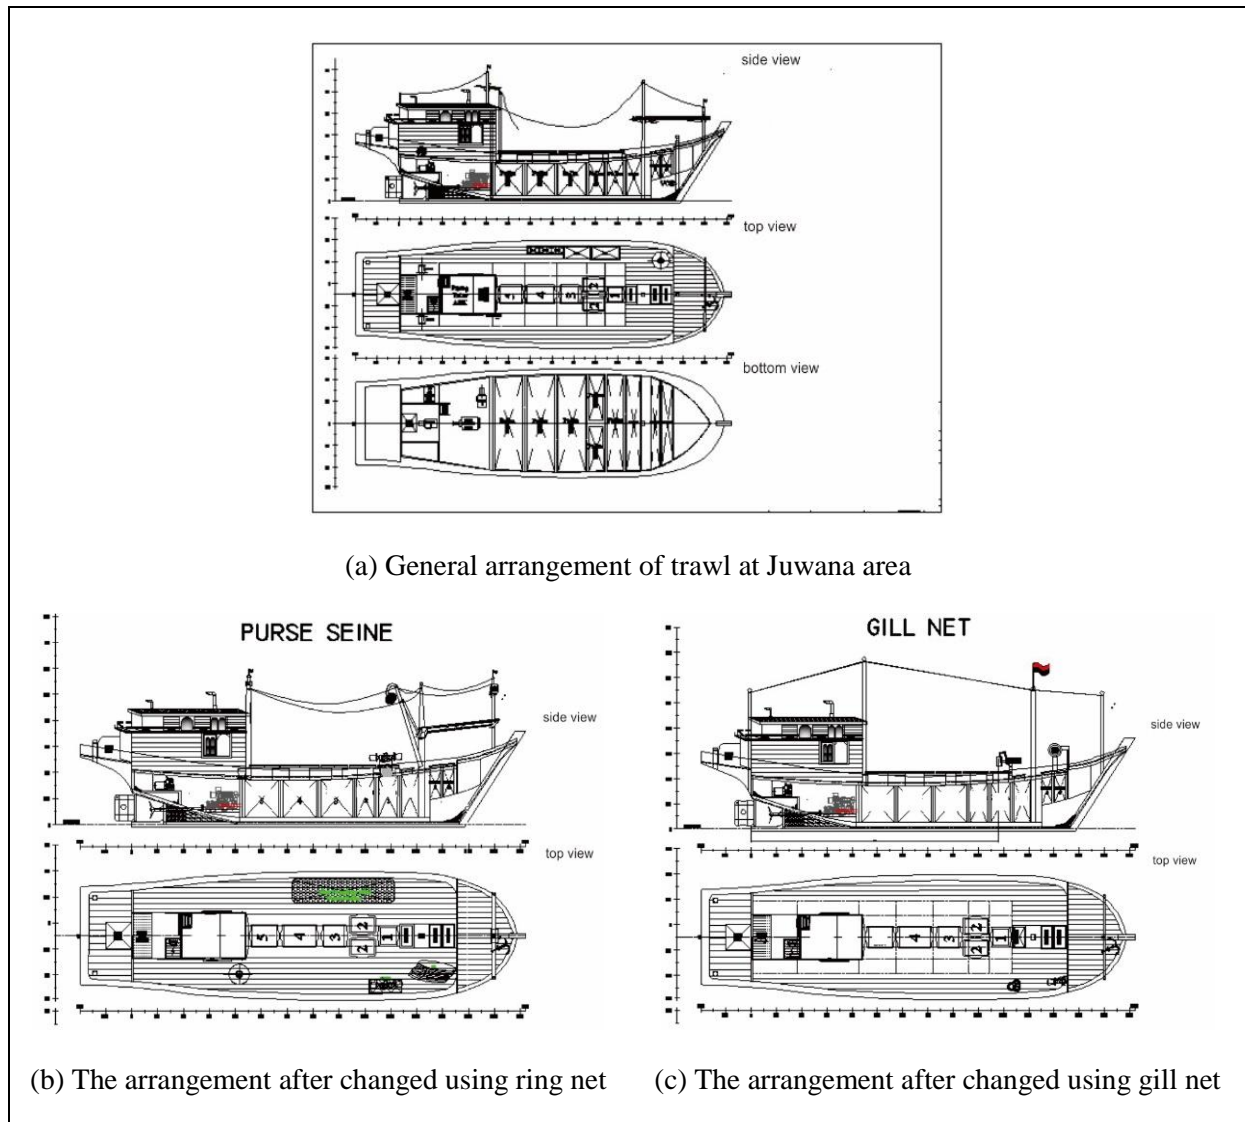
The ship's general plan layout plan after reconstruction at Juwana area.
